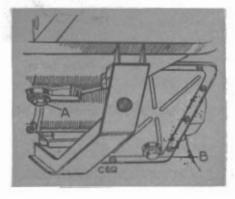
Gearbox drain plugs A—Gearbox plug B—Transfer box plug
